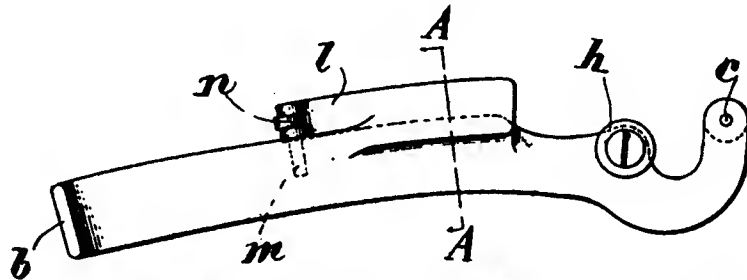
SIDE VIEW OF TIRE TOOL, SHOWING HOOKED END, WITH ROLLERS.
